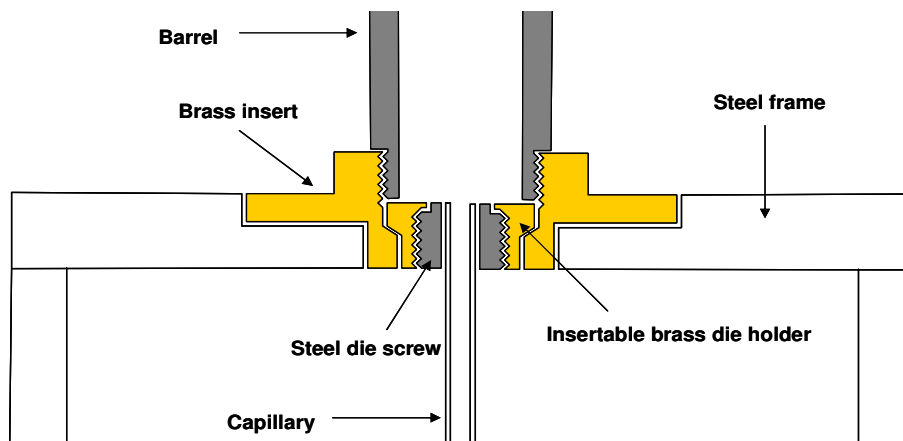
Schematic cross section showing the assembly of the frame, barrel and top plate insert
